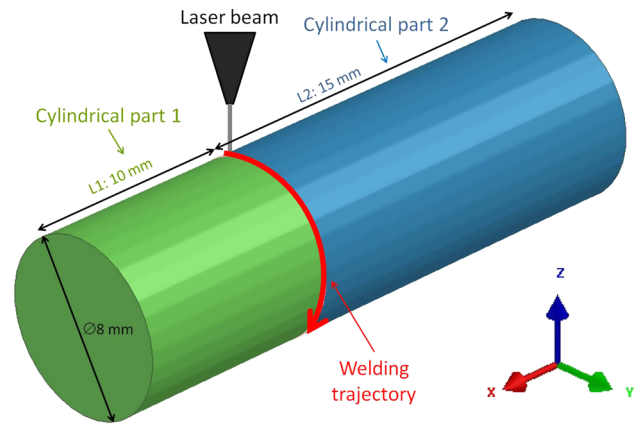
Geometry used for the simulation of laser keyhole welding of dissimilar metals.
